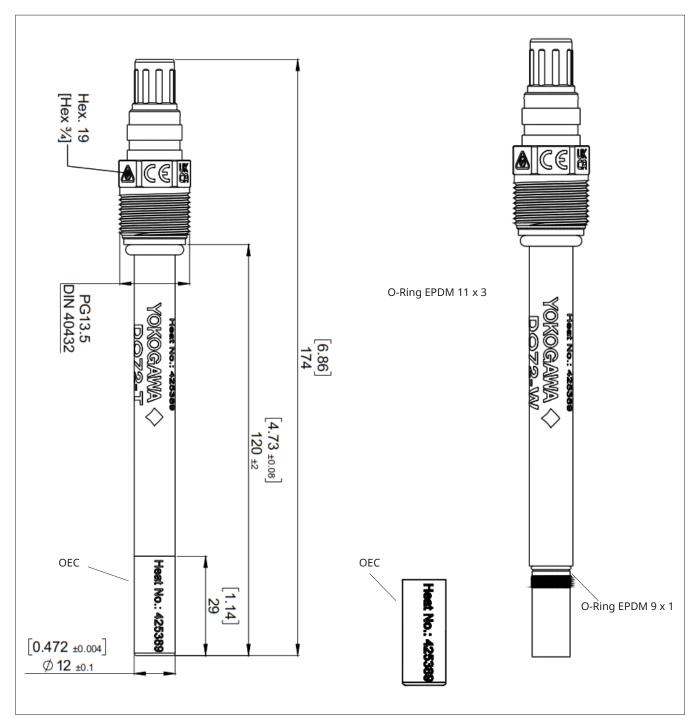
DO72-W and DO72-T dimensions in mm [inch]
